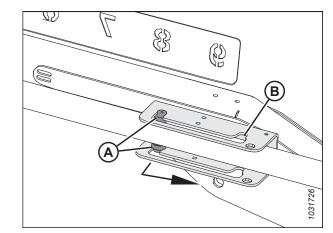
Fore-Aft Cylinder Adjustment Type 2 – Forward Position
